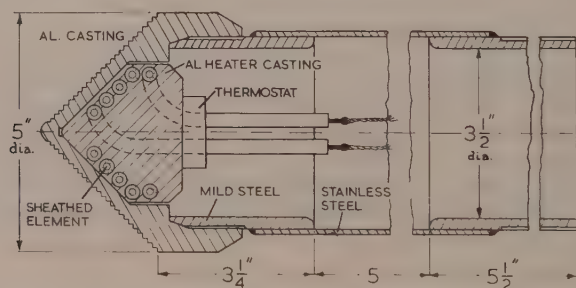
Details of the construction of the 5 inch (12.7 cm) diameter drill used in 1956.
